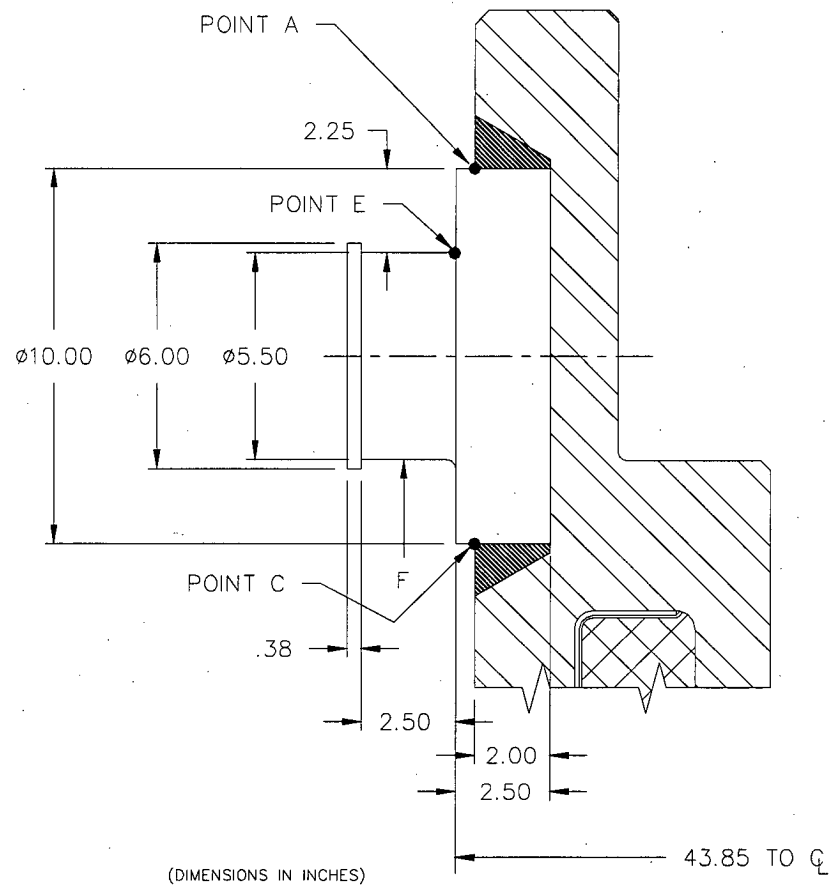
Trunnion Weld Geometry
